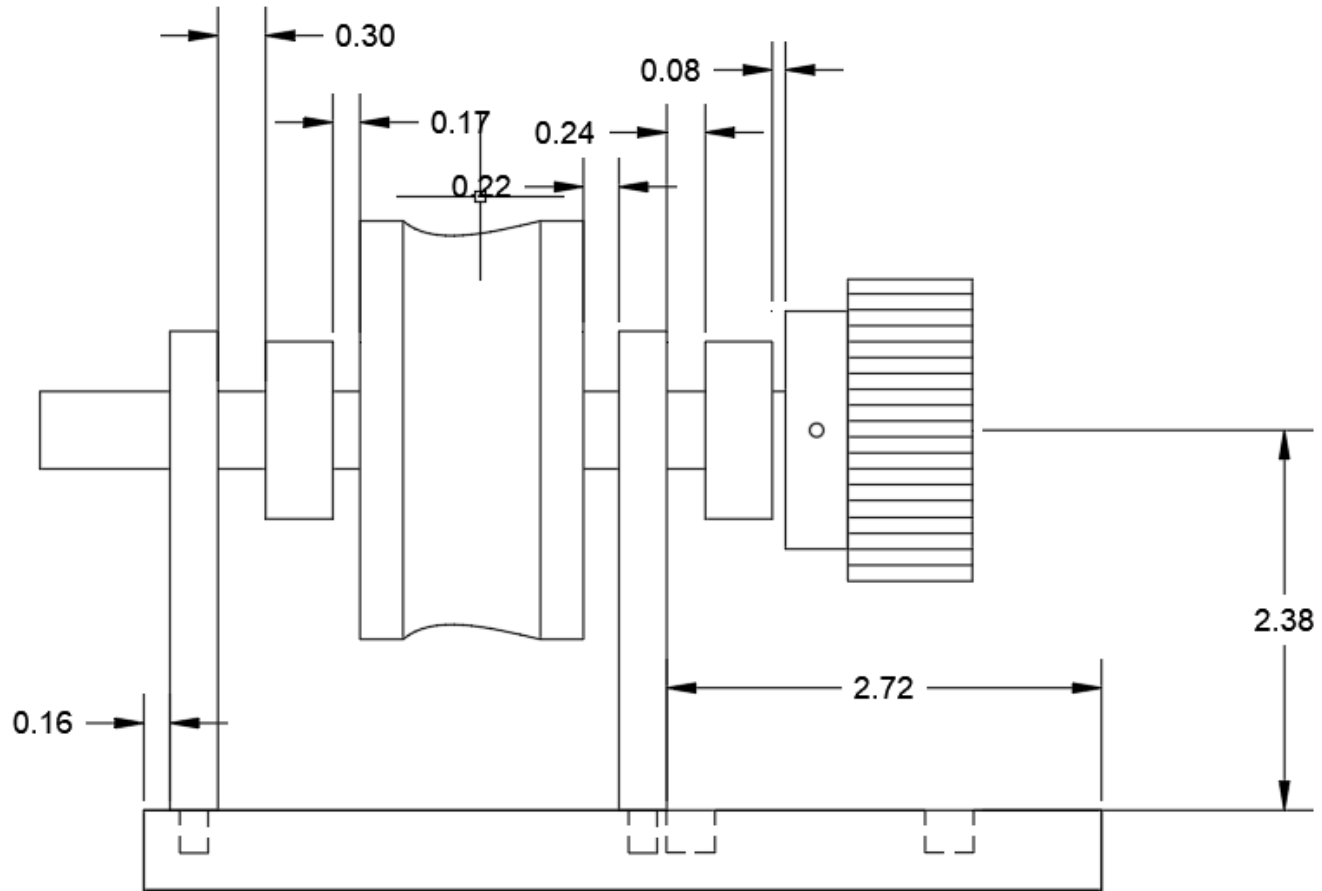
Driver Mechanism for the Lid Driven Cavity Flow, Side View
